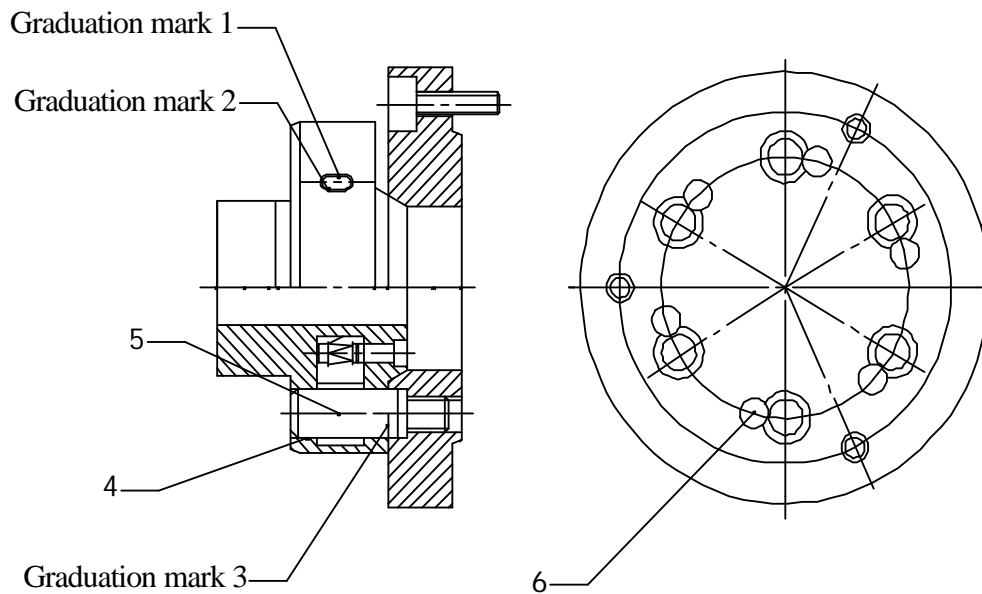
Mounting of chuck or driving plate onto spindle ISO702/ No.8
